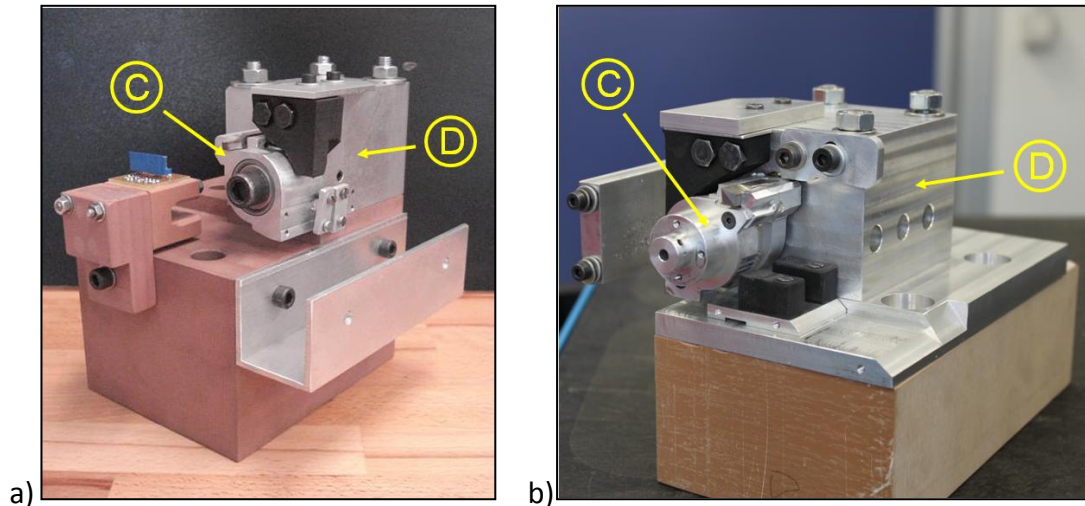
a) First and b) second version of the tool holder block [C = rotating part, D = stationary part] .
